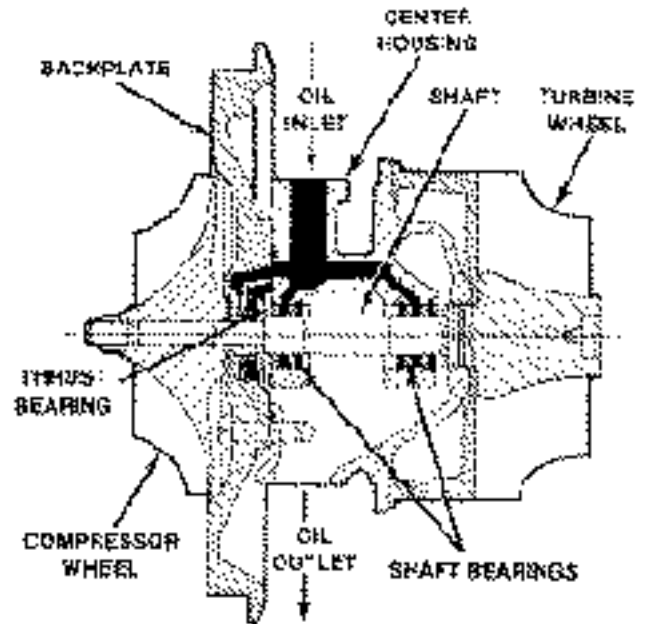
Turbocharger lubricating oil flow. (Courtesy of Detroit Diesel Corporation.)
